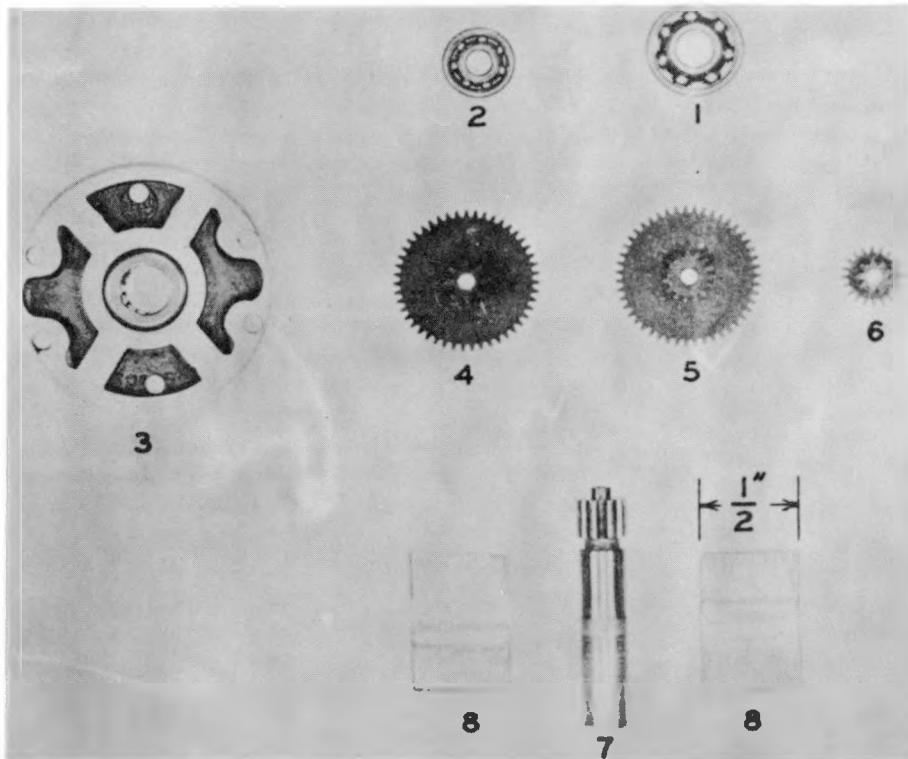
Weighed parts of low-speed bearing test unit.
